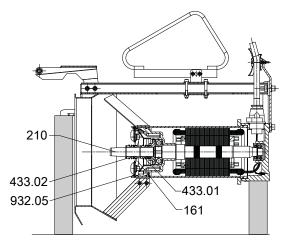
Removing the mechanical seal of an Amaline 200, 300 with motor 0 6 or 2 6, 400
